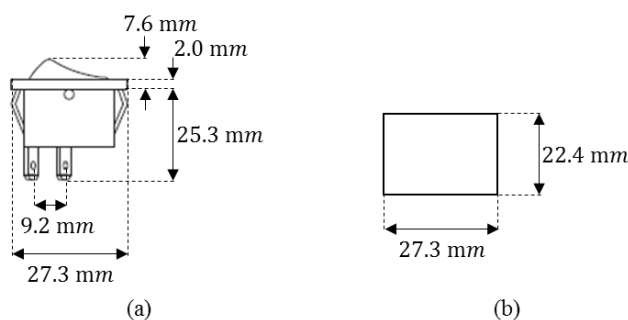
Dimensions of the single pole rocker. (a) Side-view [175], (b) Top-view
